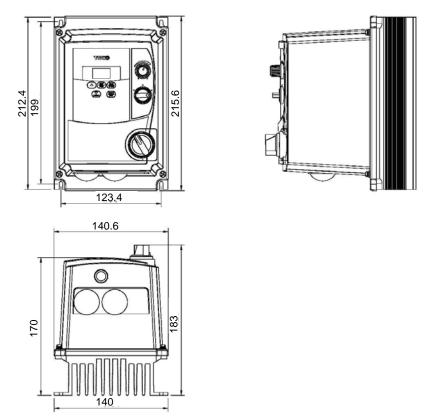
EV drive IP65 (switch) frame 1 dimensions
